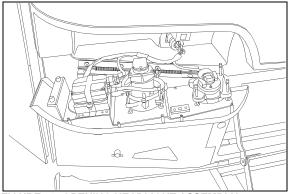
OPENING HEADLIGHT ASSEMBLY
